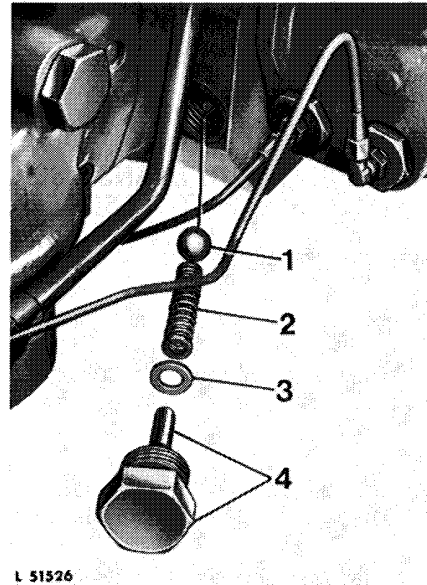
Relief (Safety) Valve in Clutch Housing
